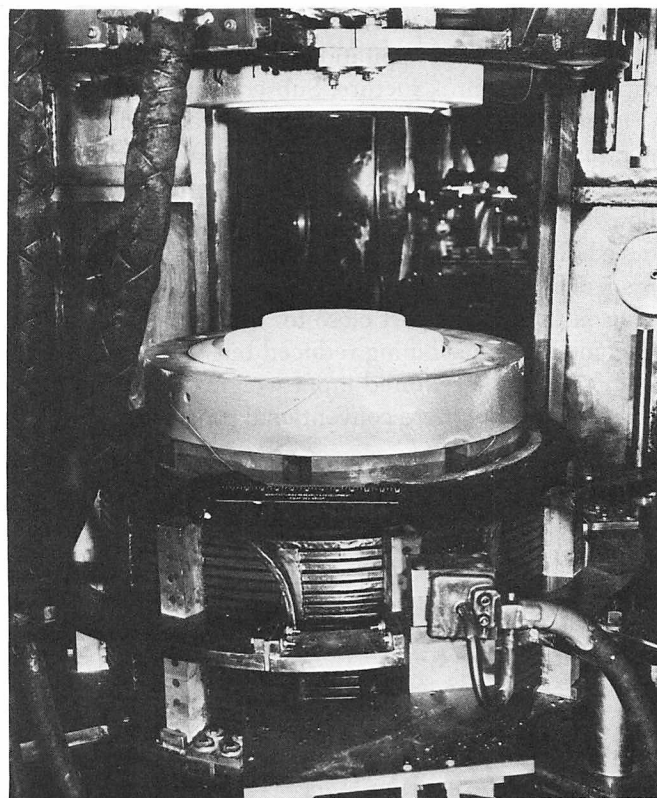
IN-100 turbine disk forging on bottom die of Gatorizing forging press.
